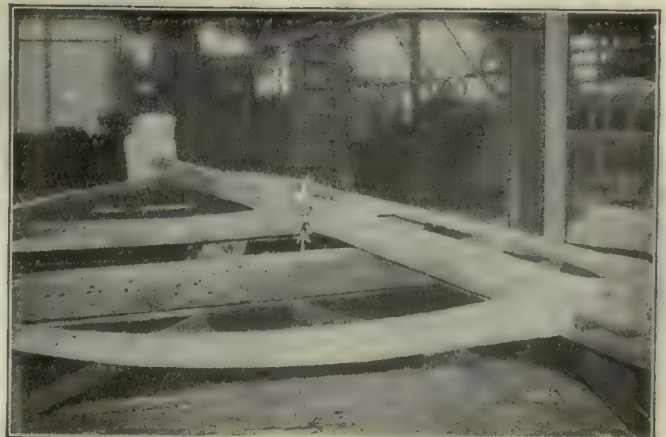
RUDDER FRAME READY FOR WELDING
